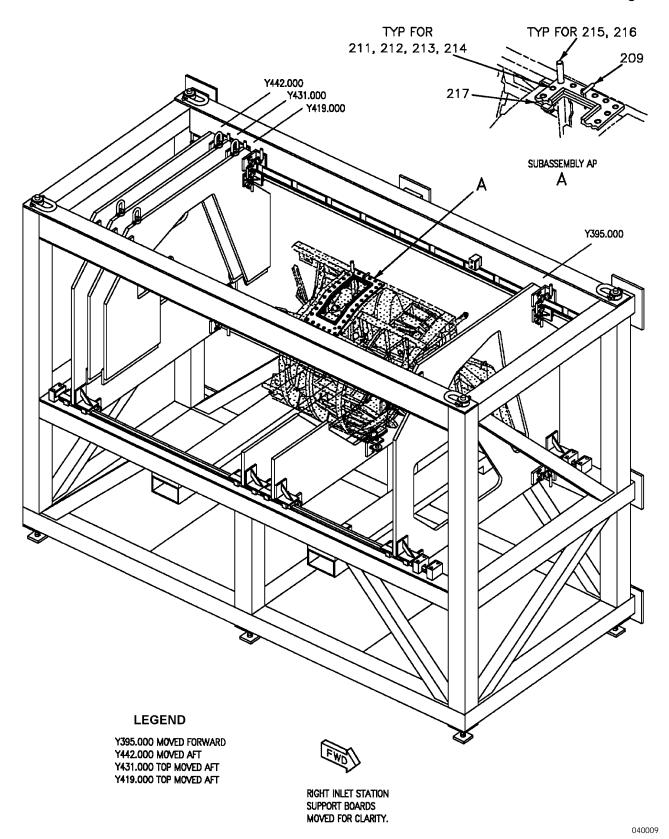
Locating and Drilling Attach Hole Pattern in Upper LEX Substructure for Access Cover 74A322609
